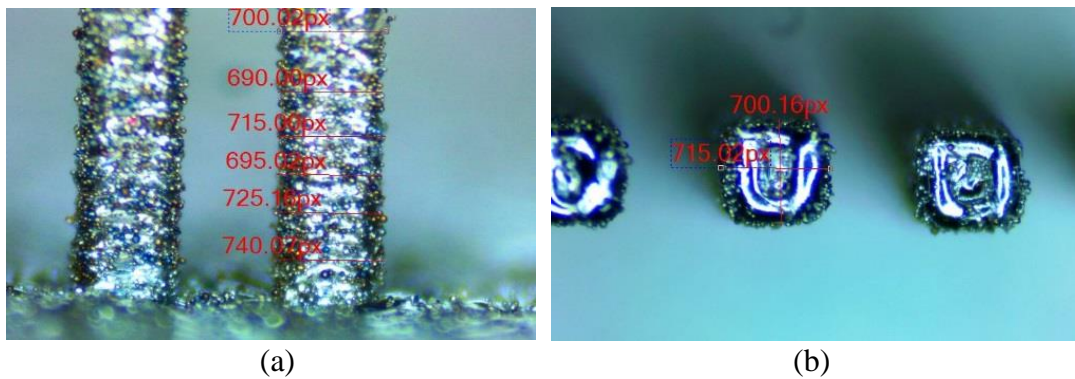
Microscope images of the beam array manufactured by metal 3D printing. (a) Manufactured beam from the side view. (b) Manufactured beam from the top view.
